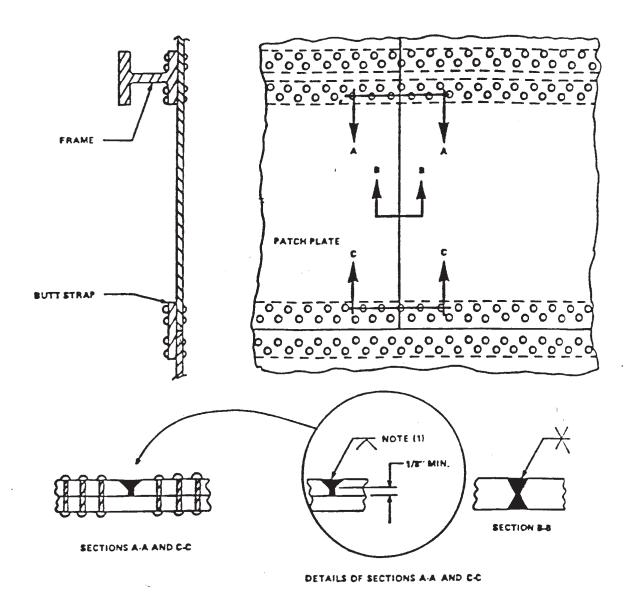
Example of Boundary Location for Welded Patch Installation
